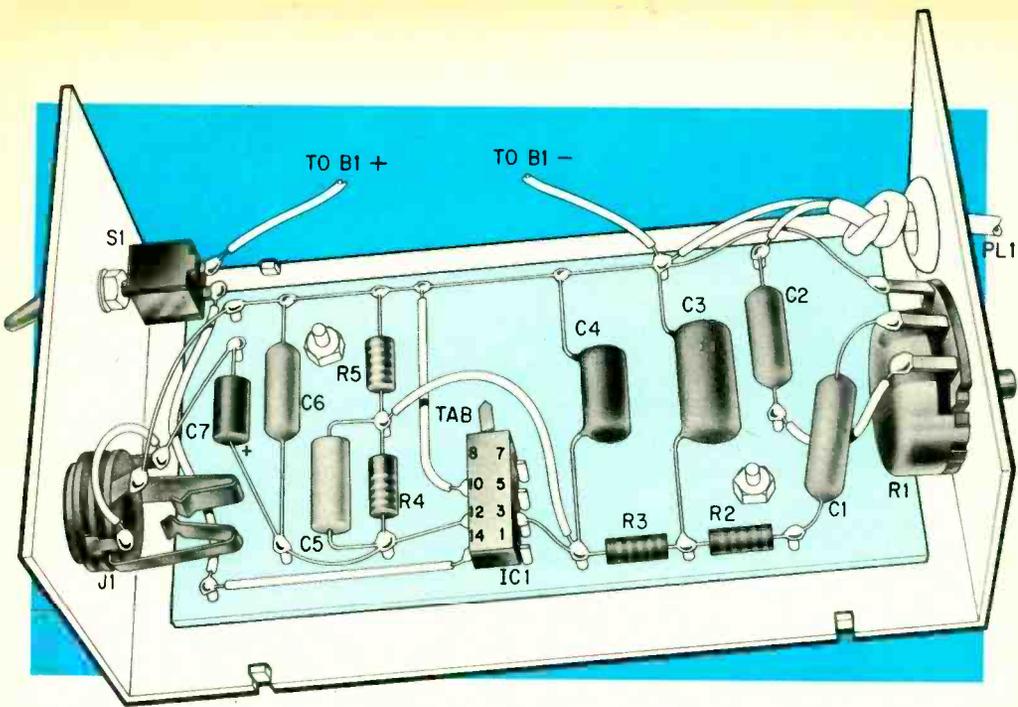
Two-wire cable connecting PL1 to chassis components can be any length desired. Mount IC1 exactly as shown with tab facing towards center of chassis. Solder IC1 to flea clips with low-wattage soldering iron to avoid solder bridging.
